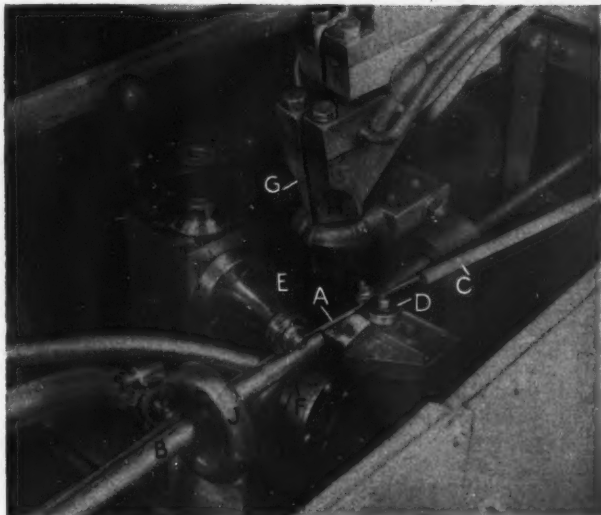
Thermatool high-frequency resistance welder and draw bench for welding spiral or parallel fins to the surfaces of tubes
